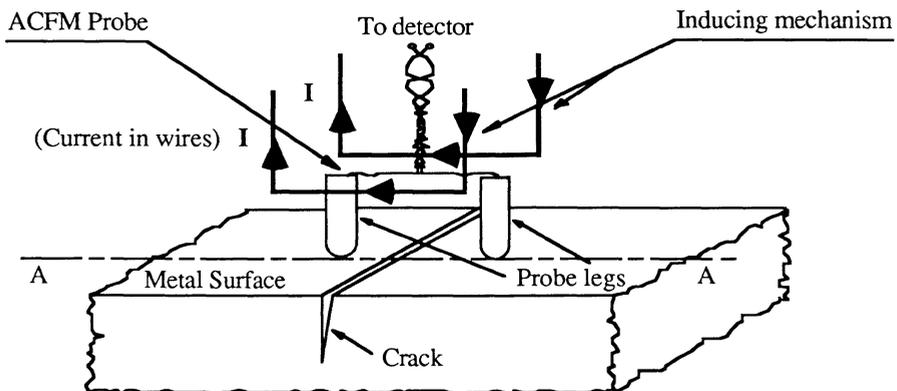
ACFM probe together with a two-wire inducing mechanism.
